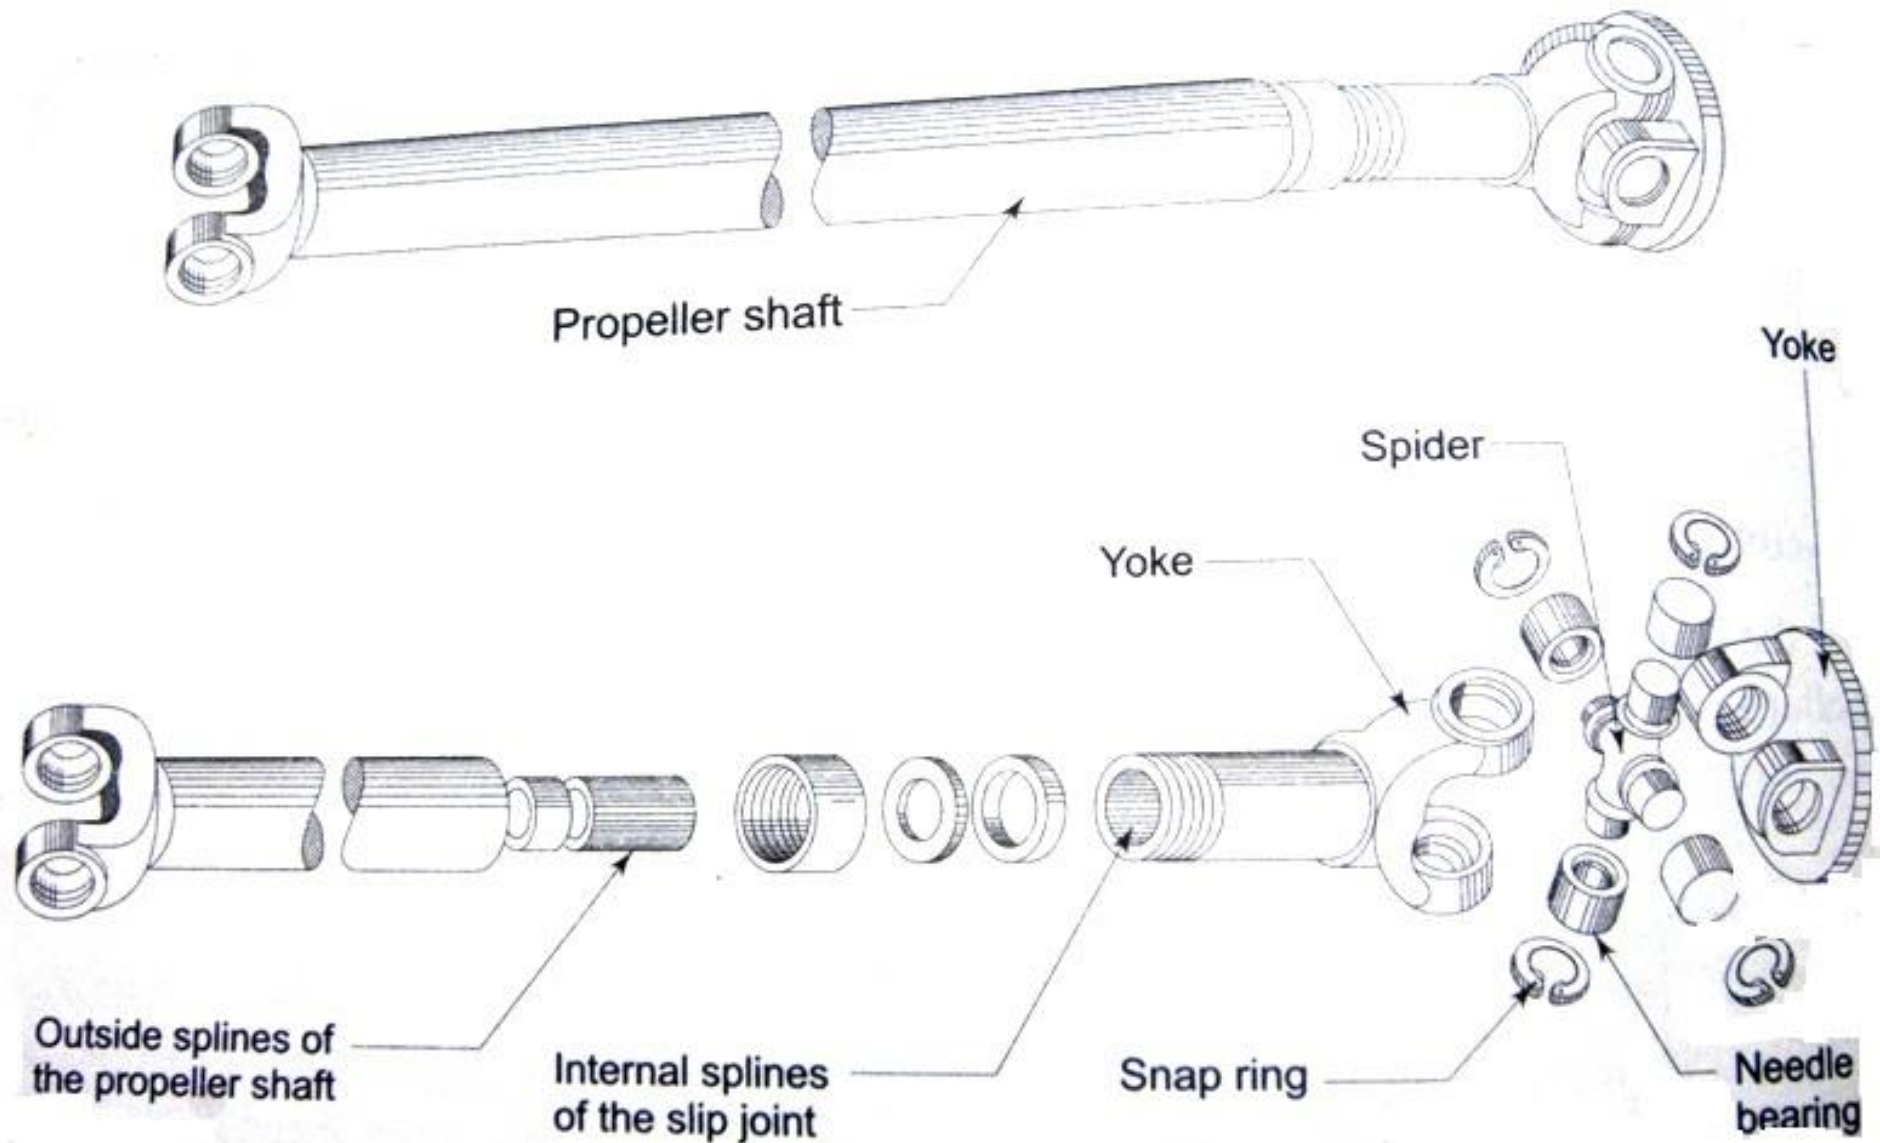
The propeller shaft with two yokes and spider universal joint
